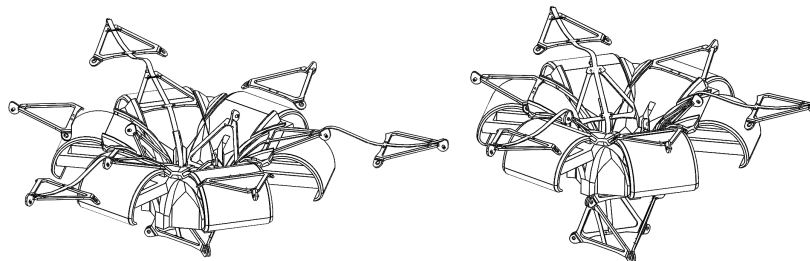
A passive mandrel type of assembly requires a distance constraint such as a belt or a chain between the components.
